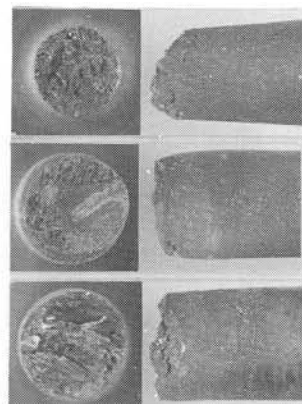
Macro-view of Ruptured Specimen of Hastelloy X (HAEM)
